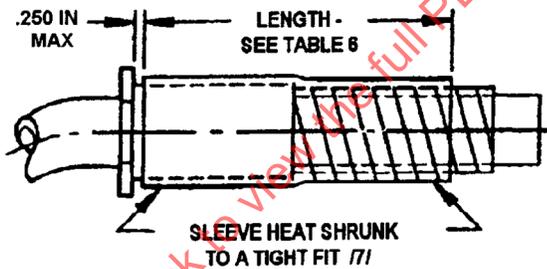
ABRASION SLEEVE ATTACHMENT
